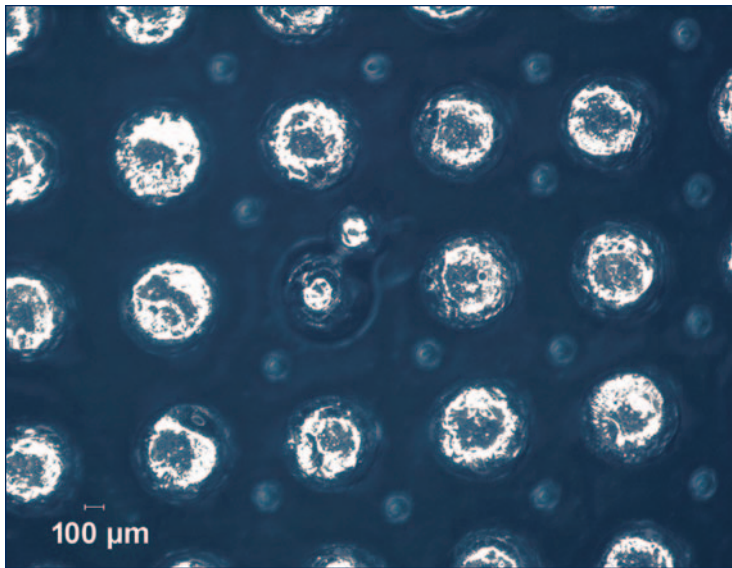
Optical micrograph of BGA defect showing small solder ball attached to main solder ball and black residue around periphery.
